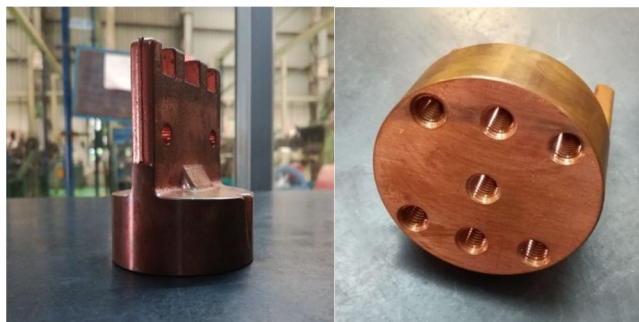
Electrical Breaker Component Figure 2: Component Bottom View
